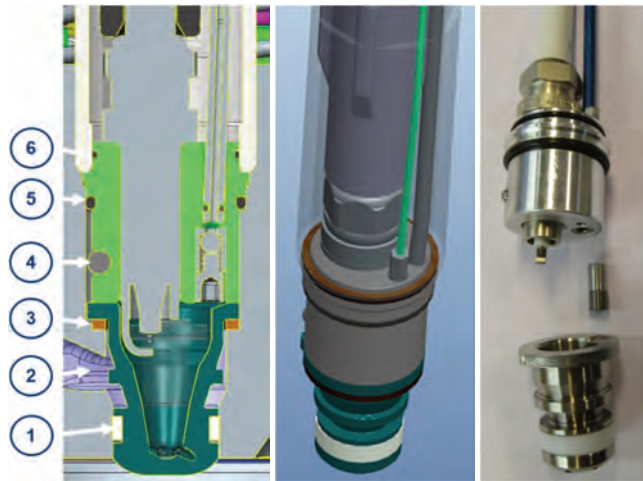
Section view through prechamber assembly, 3D view and photo of hardware
